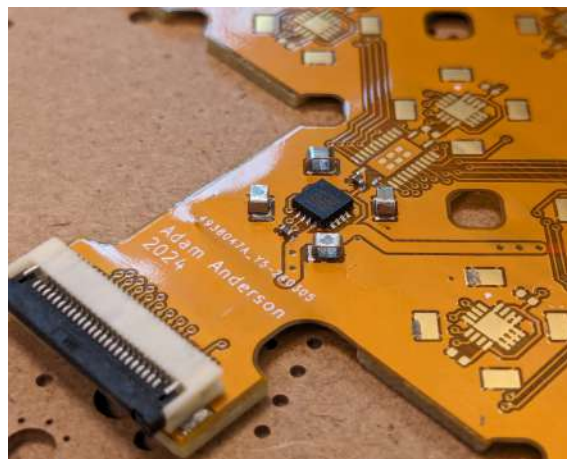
Picture of a single node and the connector soldered on the FPC.
